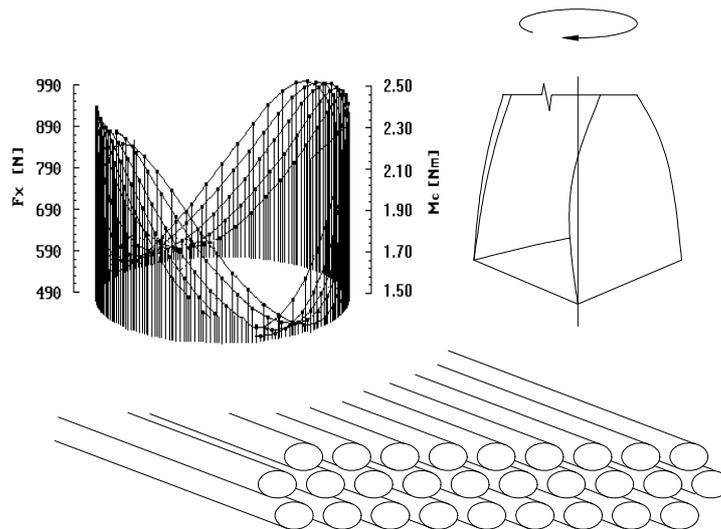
Typical oscillations of the feed force and torque during five rotations of the drill due to fibrous structure of the composite. Mitsubishi sintered carbide drill GP 20 M (with TiN coating), diameter 14.5 mm, $v = 32.3$ m/min, $f = 0.32$ mm. Machined composite - carbon prepreg.
